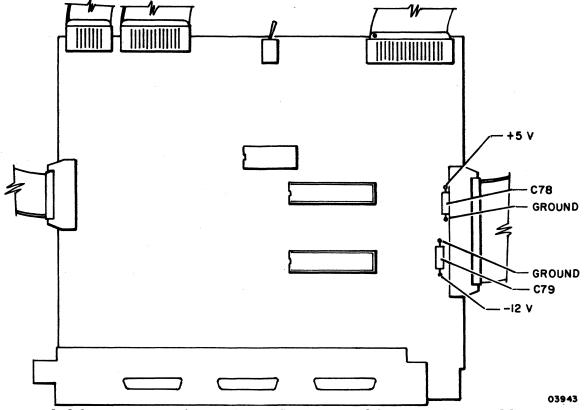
Test Points for +5 V and -12 V on Controller Board
